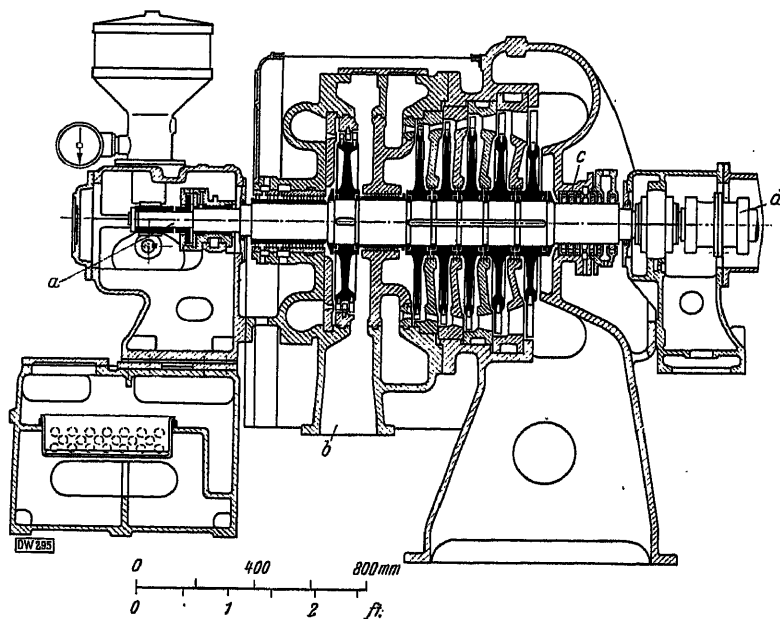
English Electric, 1375 kw., geared extraction turbine for 6000/3000 R.P.M.
